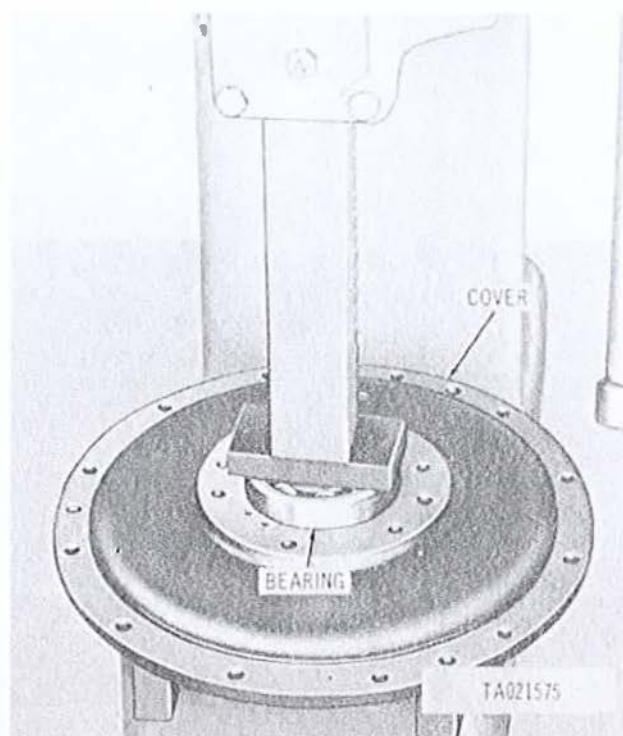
Pressing clutch upper ball bearing into fan drive housing.
